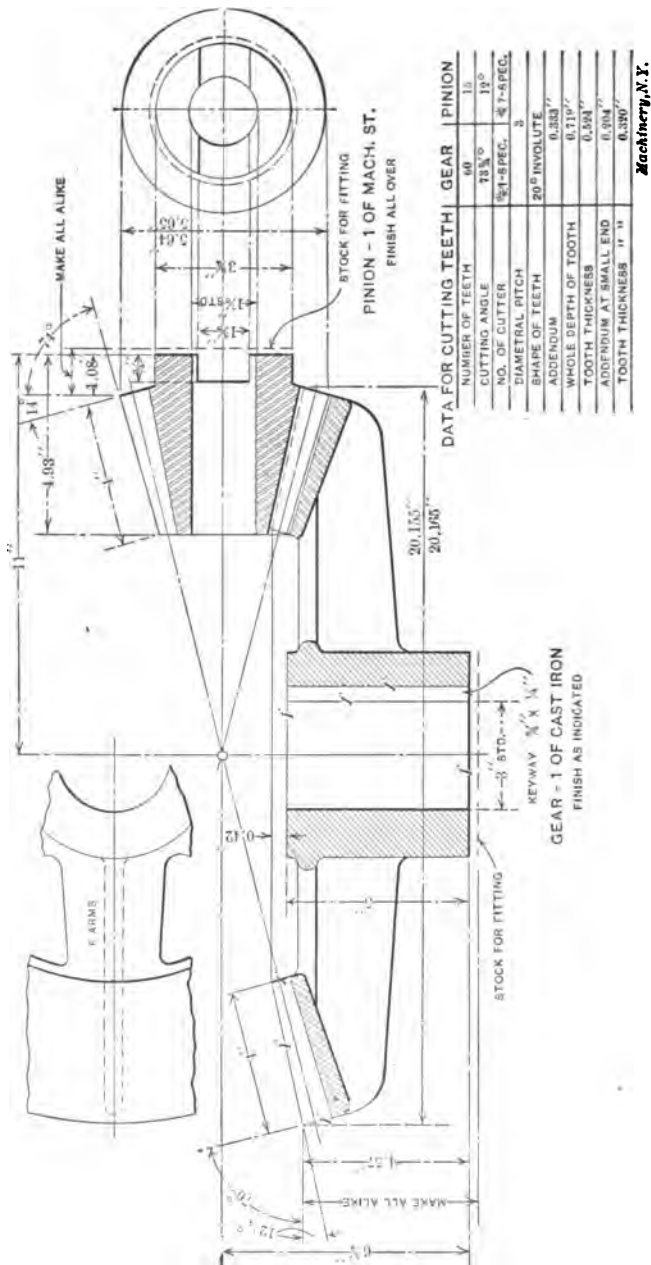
Model Working-Drawing for Bevel Gears to be Cut with Formed Milling Cutter
